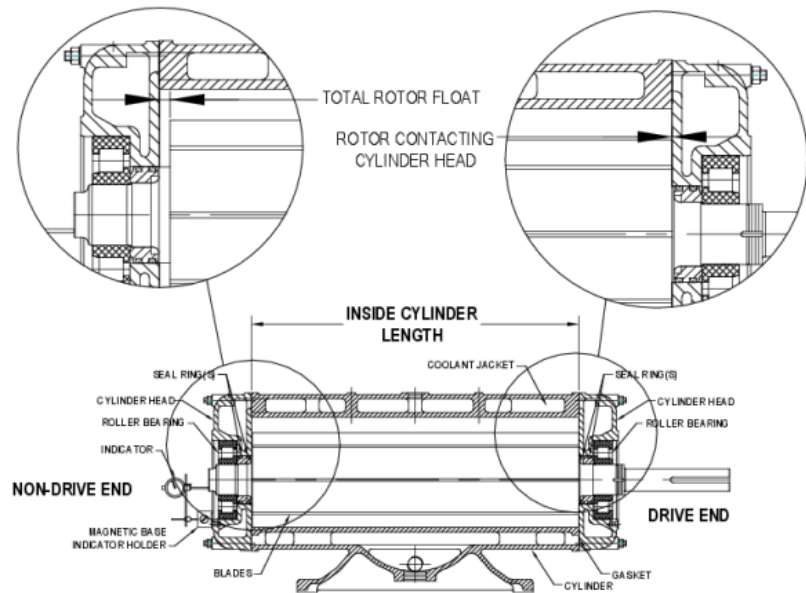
Total Rotor Float - bearings not positioned by shims or end cover / seal adapter.
